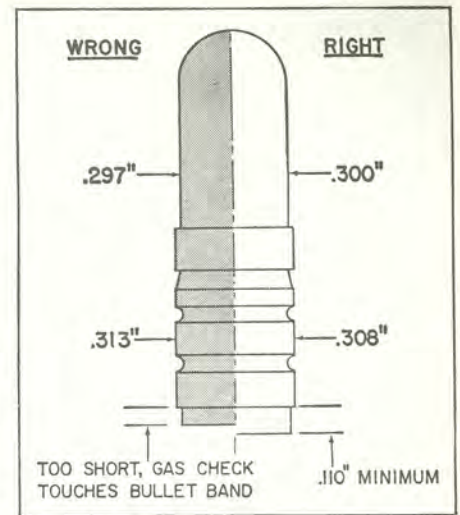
Wrong and right dimensions to which the bullet should be cast. Body should be not greater than rifle groove diameter. Forepart must be not smaller than rifle bore diameter⁴
